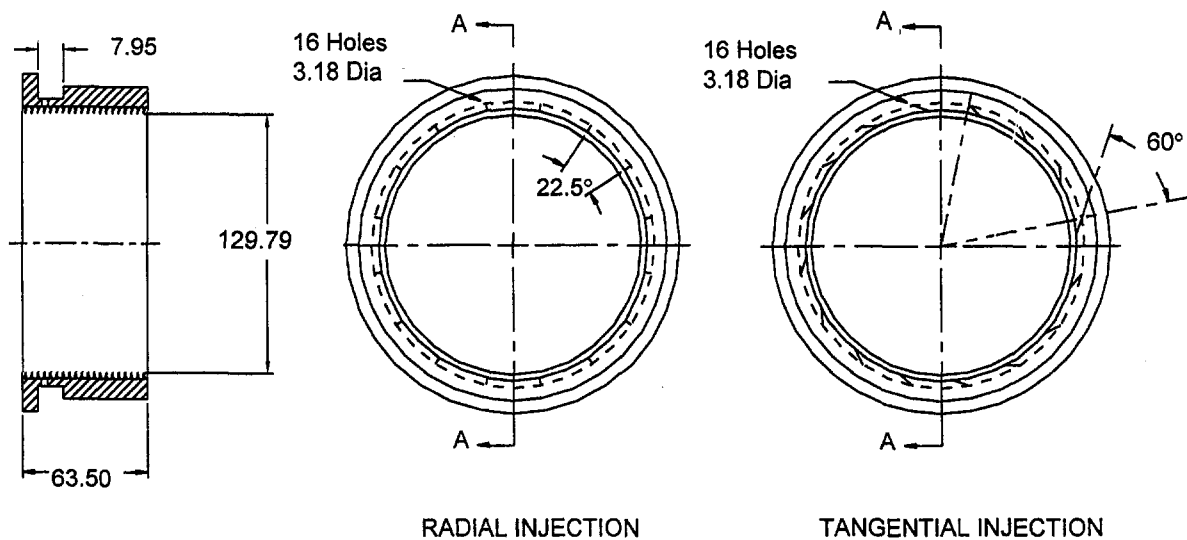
Labyrinth seal with shunt injection, dimensions in mm
